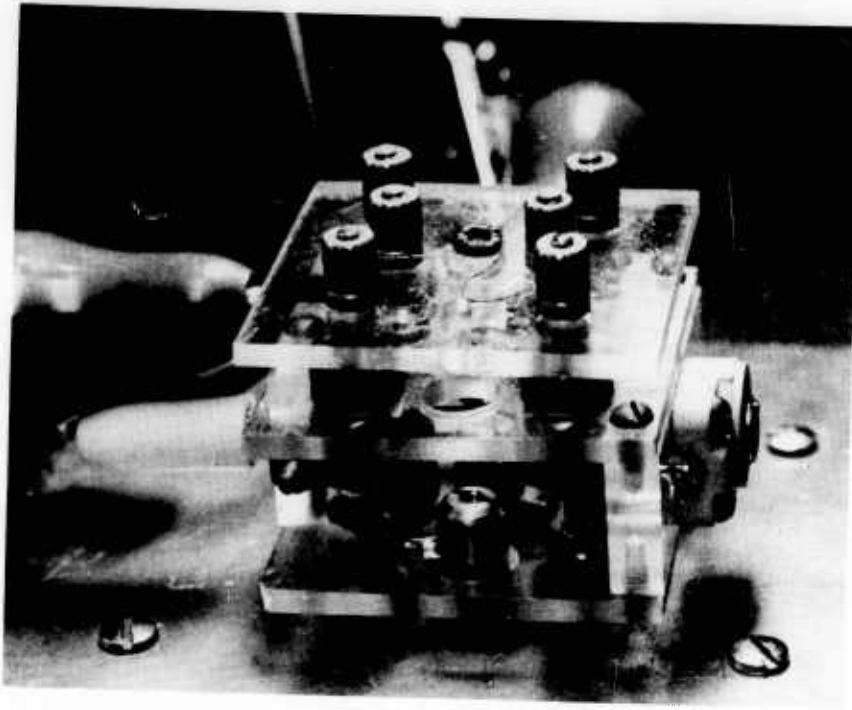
Test Jig for Unmounted Coils
